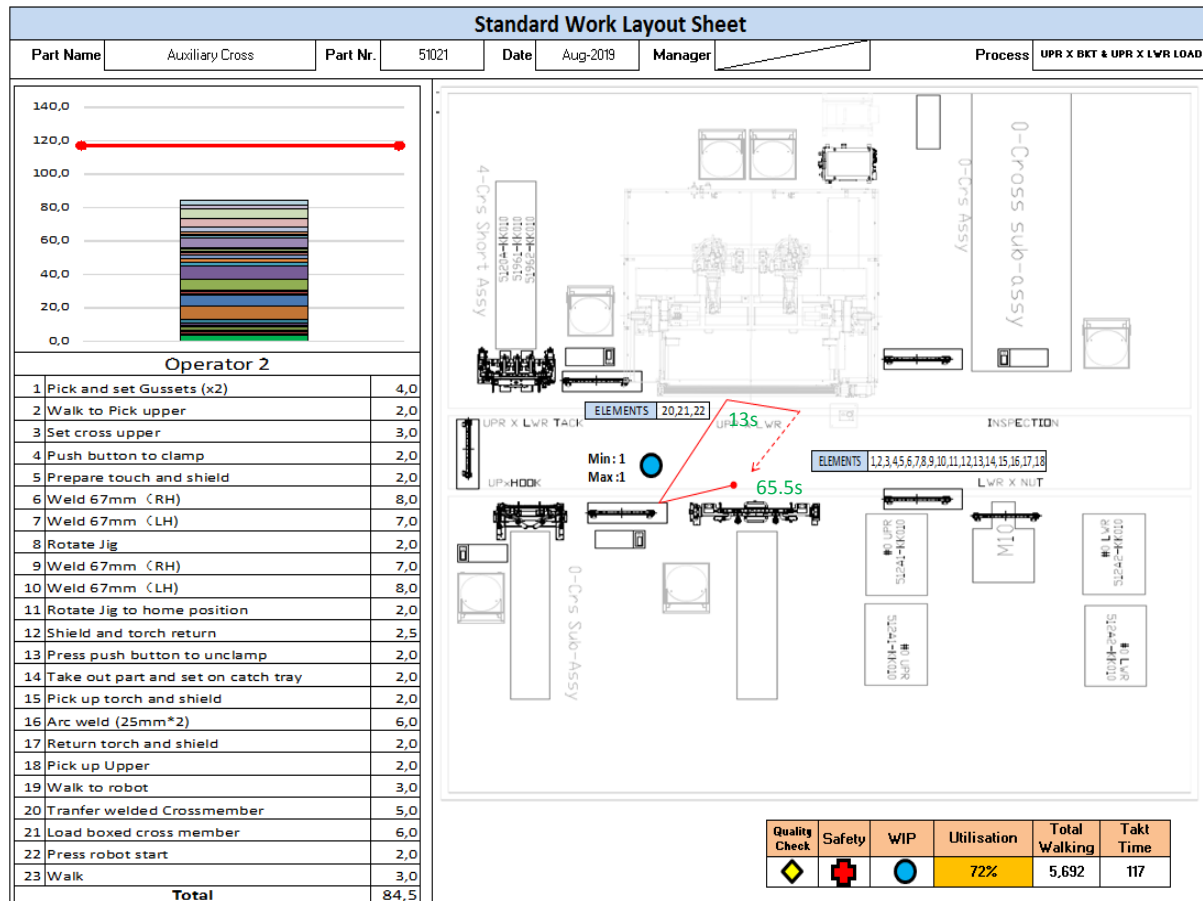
Standard Work Layout Sheet - Operator 2. Adapted from Fin (2017)
